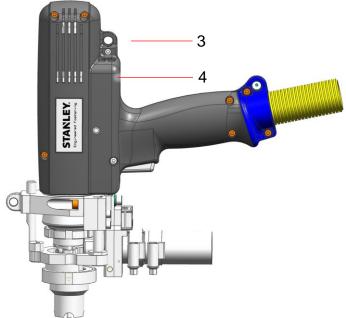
Fasten the stud weld gun to the spring balancer
